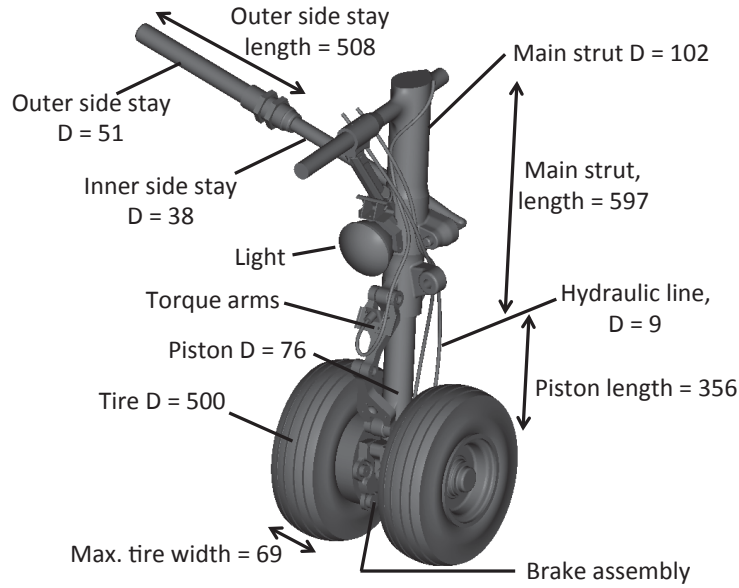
Baseline fully dressed landing gear geometry with select dimensions, given in mm.
